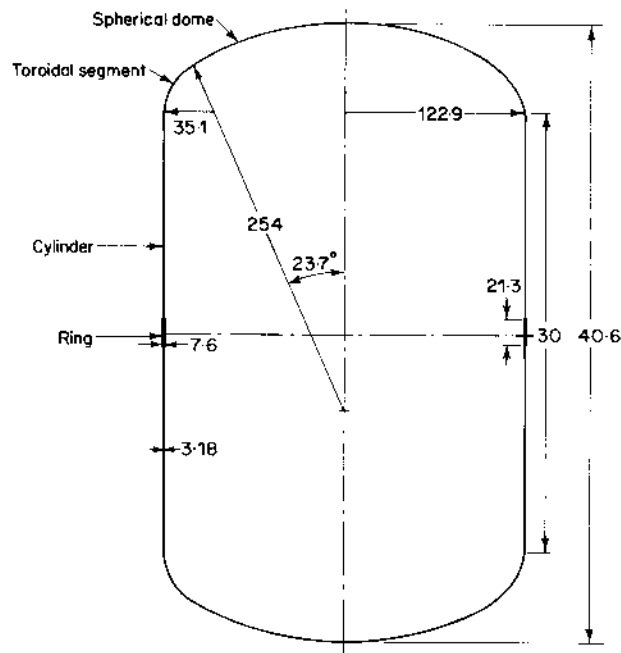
Cross-sectional view of a typical refrigeration compressor shell (all dimensions in mm).
